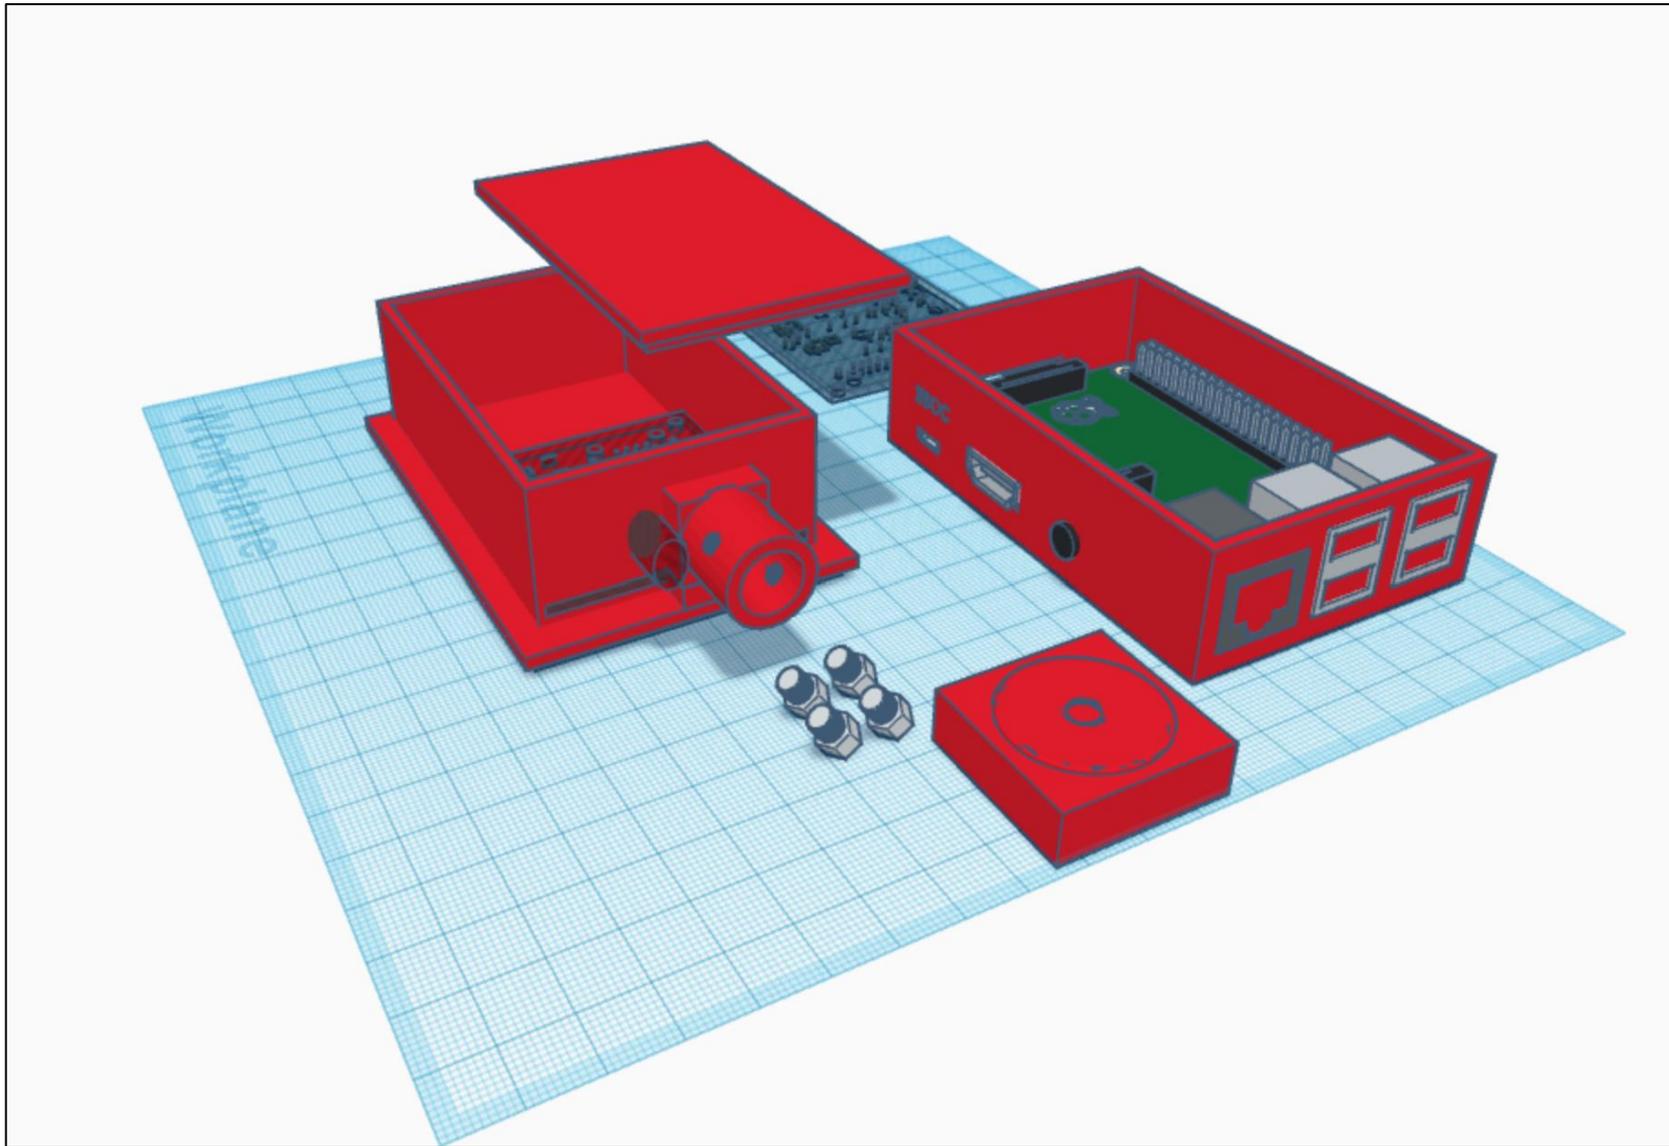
Printed Mounting Gear designed by Juan Bonilla
